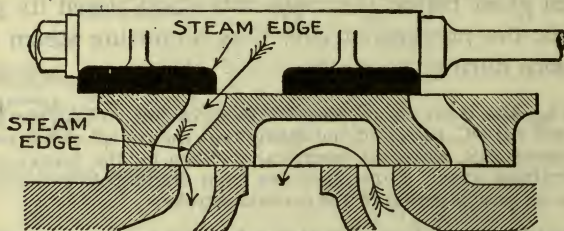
Riding cut off valve with inside cut off edges. *This arrangement having inside cut off edges gives quickest cut off with late cut offs.
